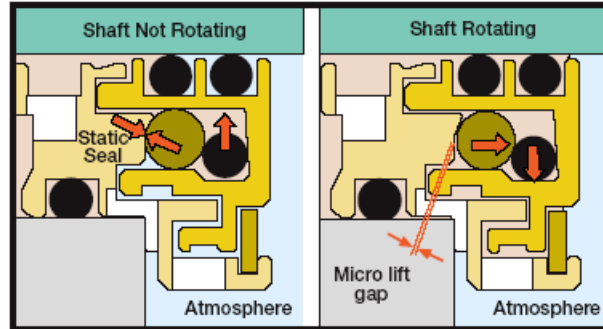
Advanced non-contacting rotating labyrinth bearing protector seal with two O-rings securely clamped the rotor to the shaft. Dynamic O-rings do not contact sharp edges
